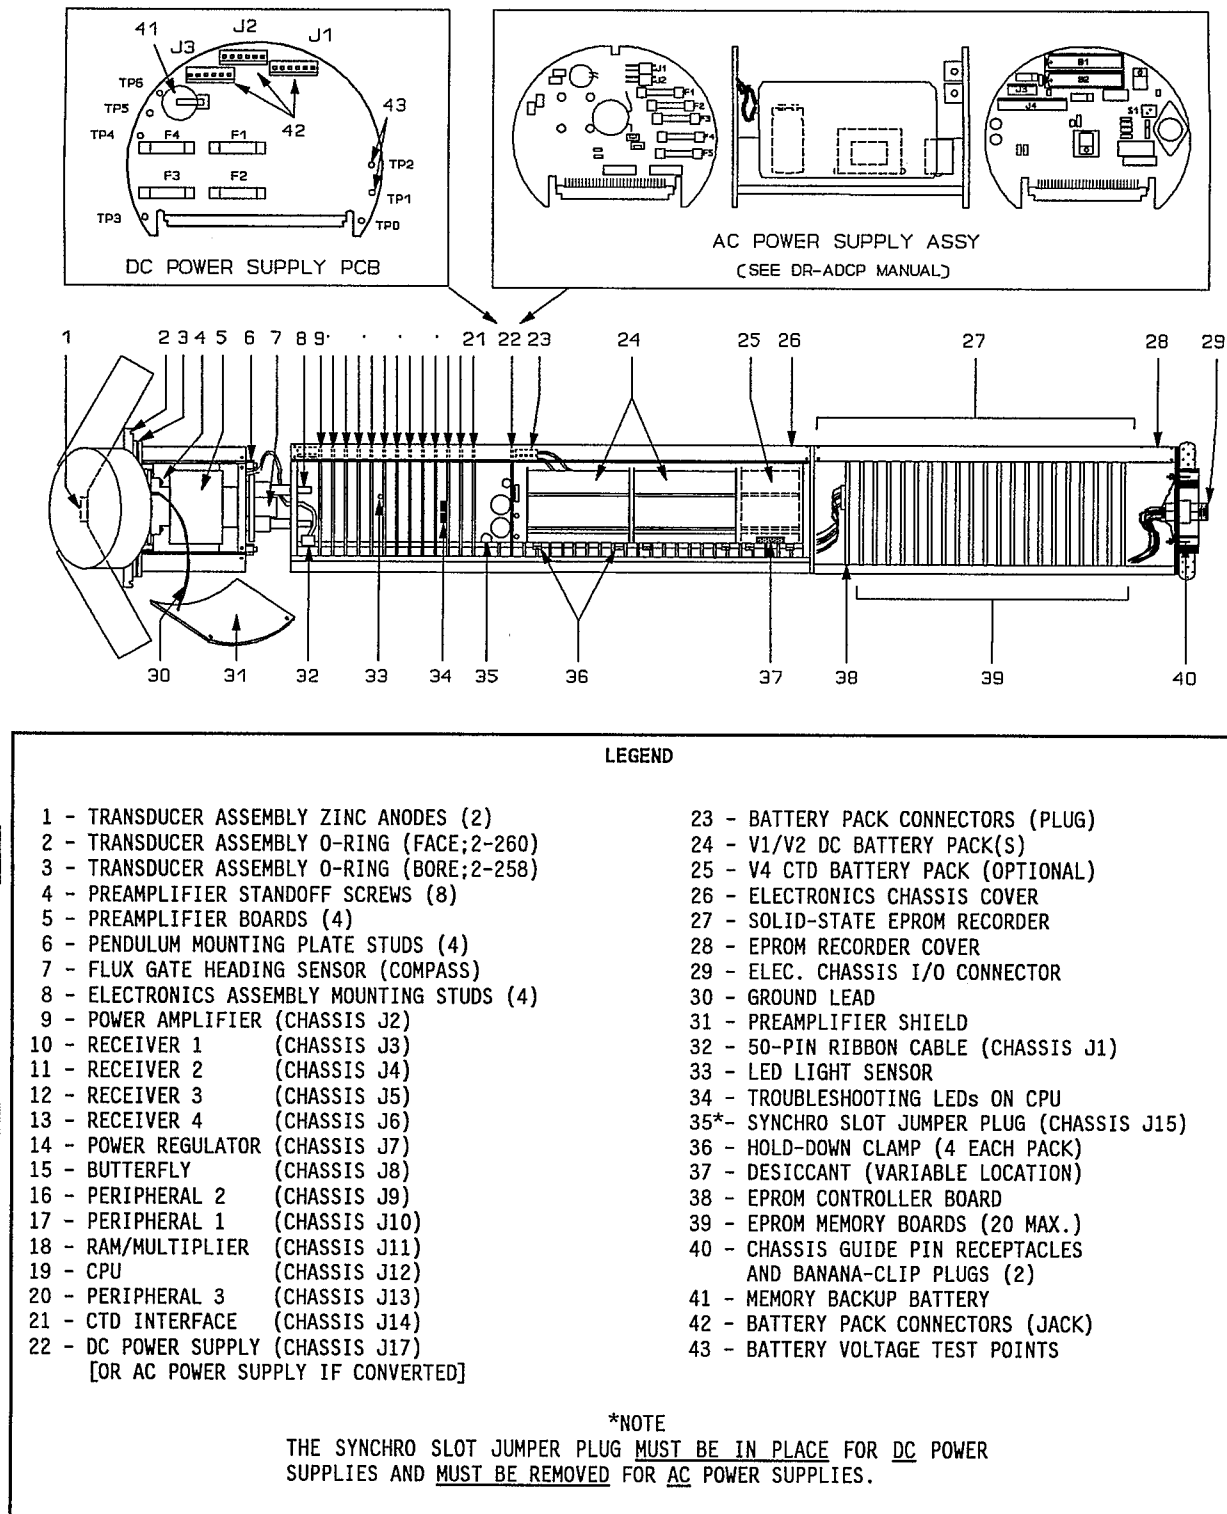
SC-ADCP Electronics Chassis Parts Identification
